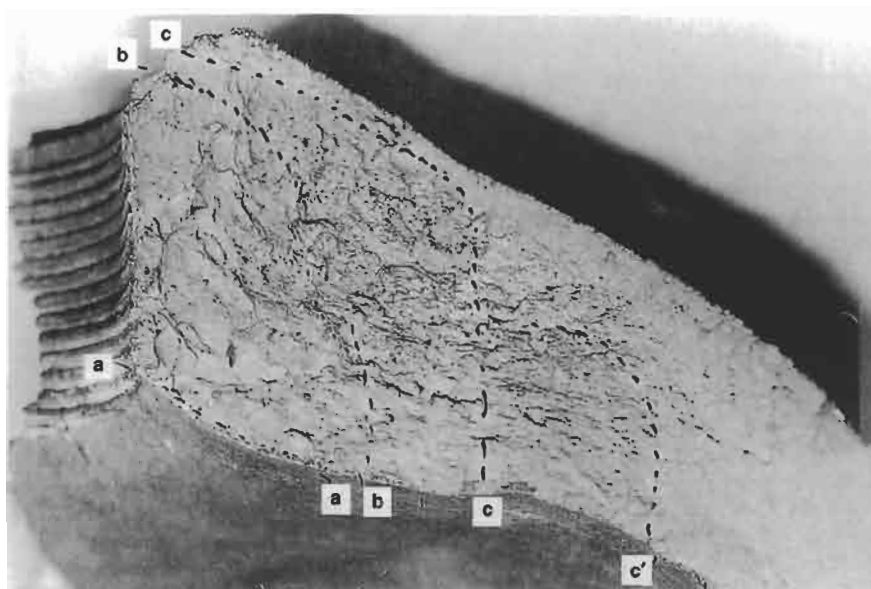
The fracture surface of one of the four fractures of cylinder B. The photograph has been marked to highlight beachmarks caused either by damage during hydrotests of the cylinder or indicating changes to the crack growth mechanism. Some growth stages might leave no clear beachmark.
